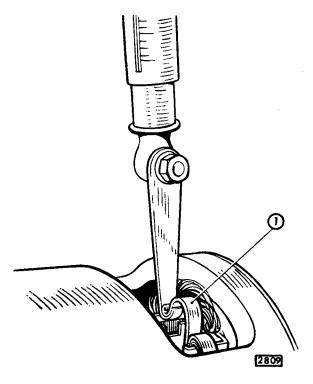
Testing the brush spring tension. Brush spring indicated.
